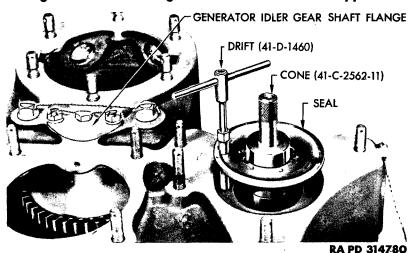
Alining Retaining Screw Holes for Oil Seal
